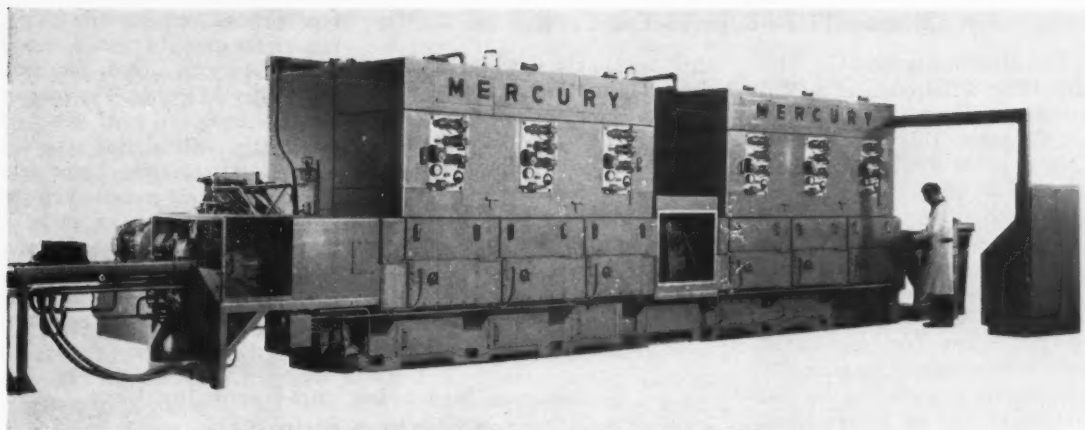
Nine-station electrically controlled transfer machine for processing torque converter housings built by Mercury Engineering Corporation
